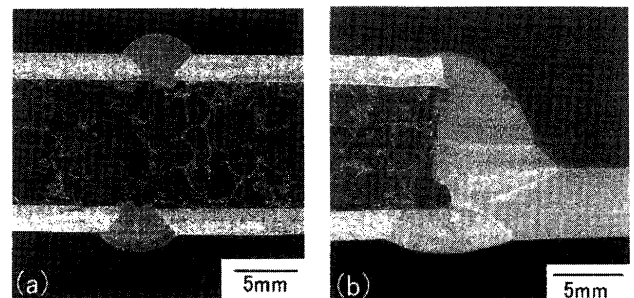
MIG arc welds of Al sheet sandwich foams; (a) sandwich sheets were welded to each other, (b) sandwich sheet was welded to Al alloy plate¹³⁾.
